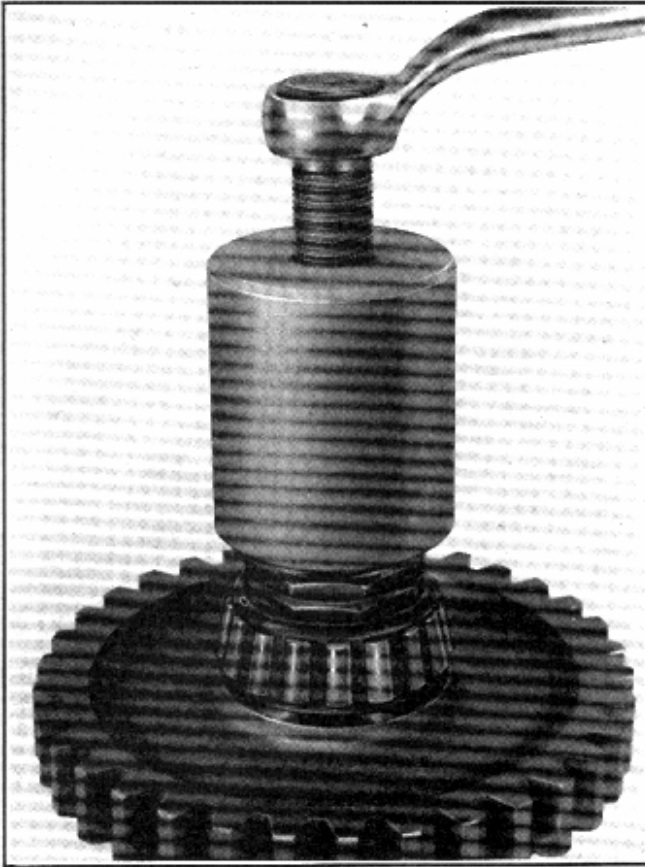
Removing Speedometer Gear, Tool No. J-1737
